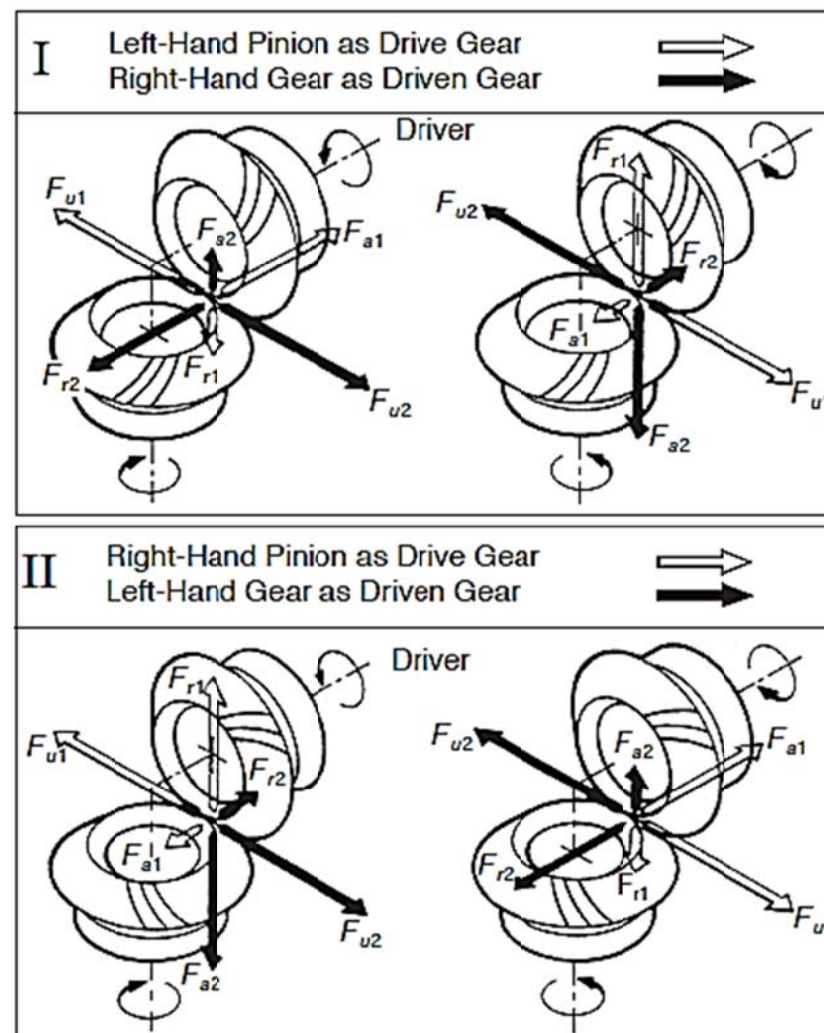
The Direction of Forces Carried by Spiral Bevel Gears (1)
